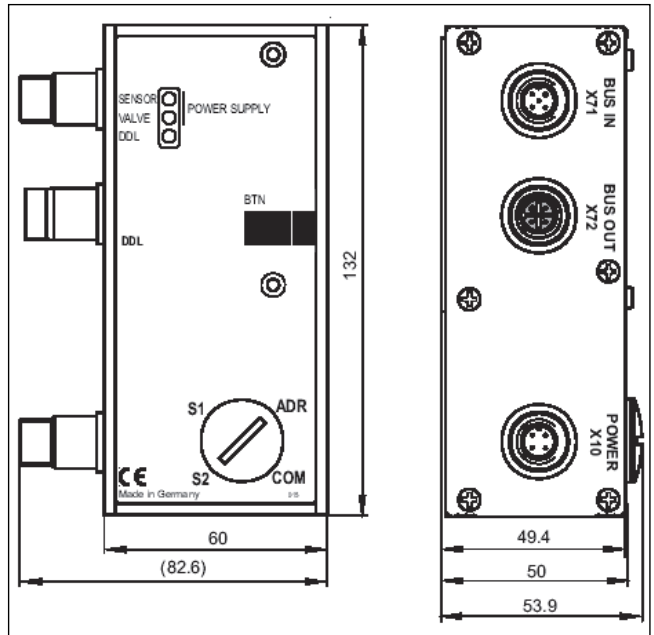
Dimensions of valve driver (1 827 030 189/1 827 030 190)
